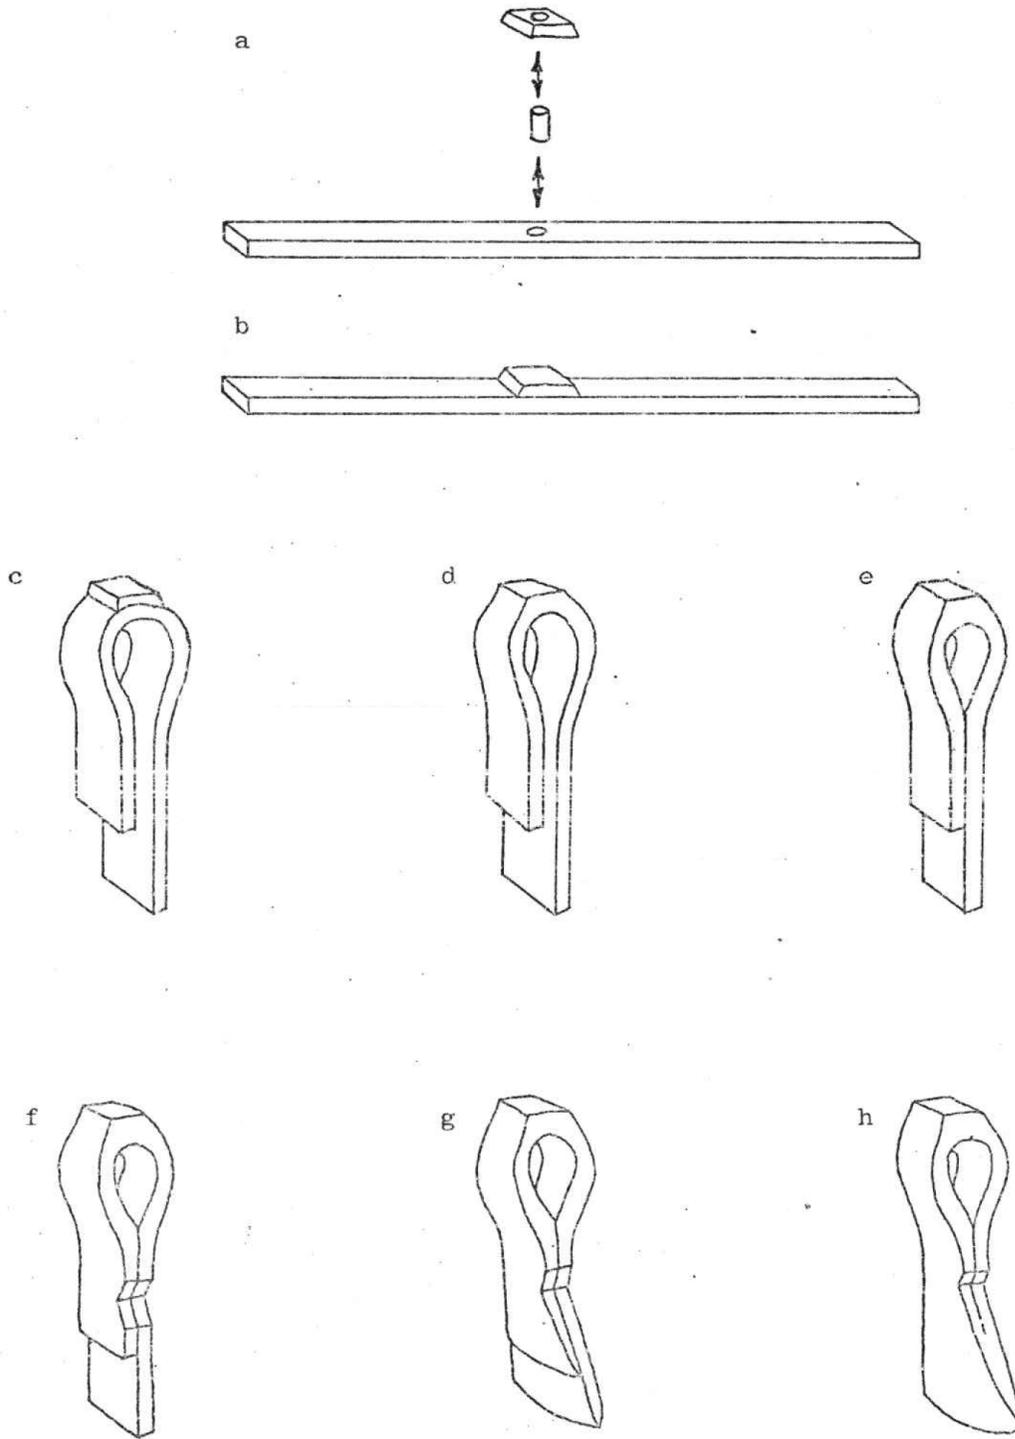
Square head, single-piece axe (FOVA Type 1).
